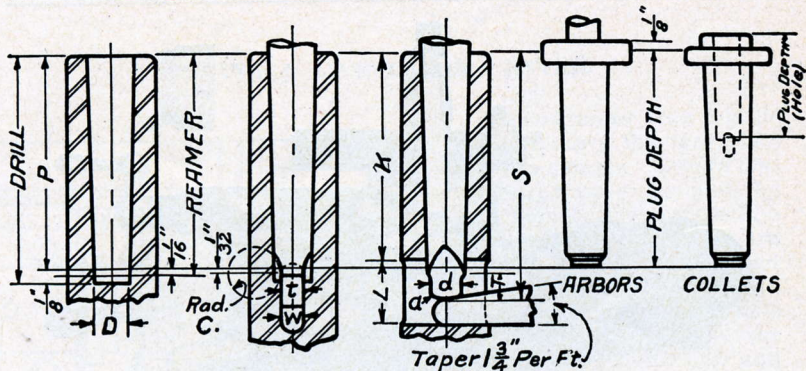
Morse Standard Taper Plug and Socket Gauge
